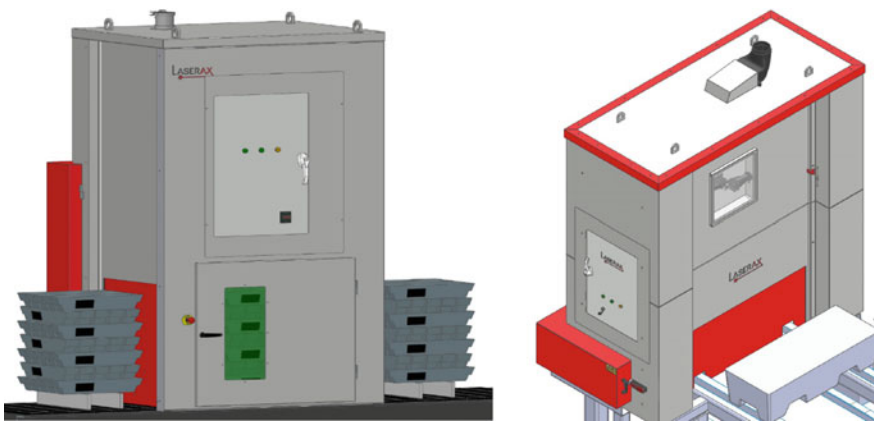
Laser marking machine for bundles (left) and jumbos (right)
